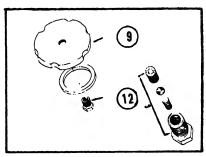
GAS CAP & CHECK VALVE ASSY.
